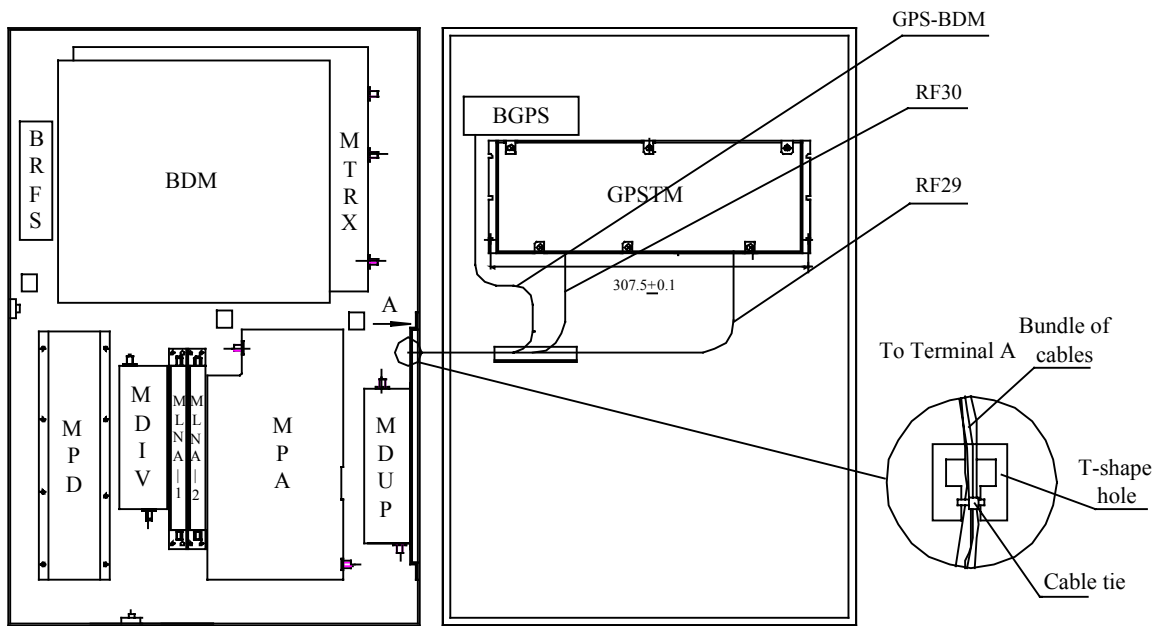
Schematic Diagram of Bundling Internal Cables (1)
